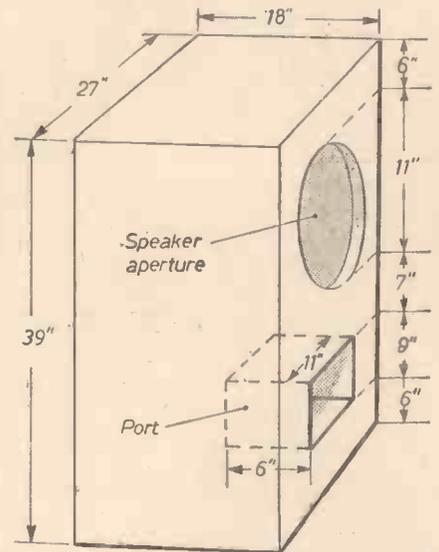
Inside dimensions of a cabinet with a ducted port.
